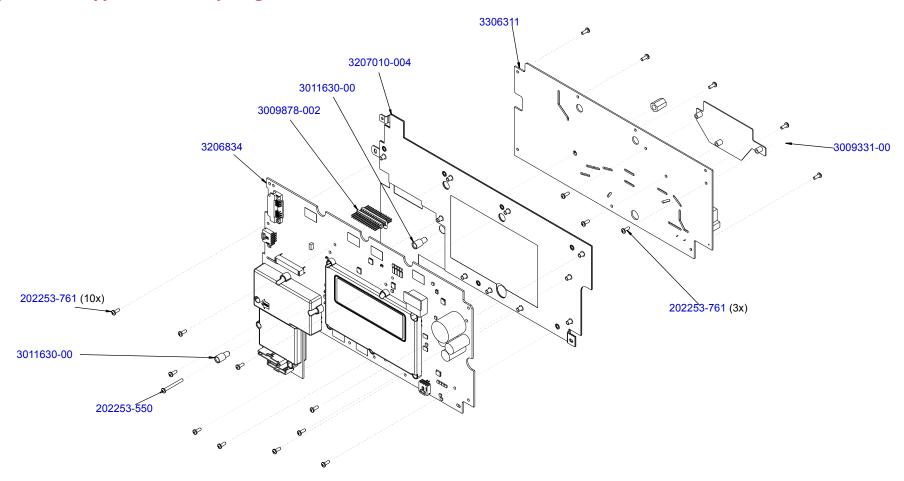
System/Therapy PCB assembly view 1 of 2
